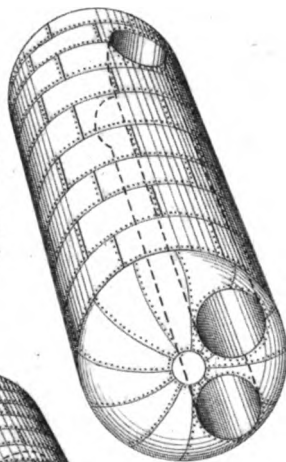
Cornish Boiler. Length 28'0" Diam. 7'0" Tube 3'6" diam.
